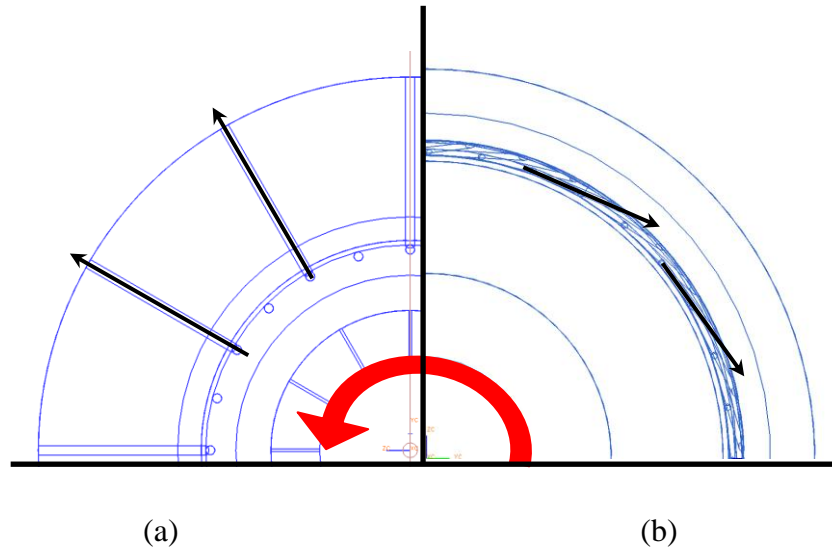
Rotary Injector (a) Original Design – Radial Injector and (b) Final Design – Back Swirl Injector
